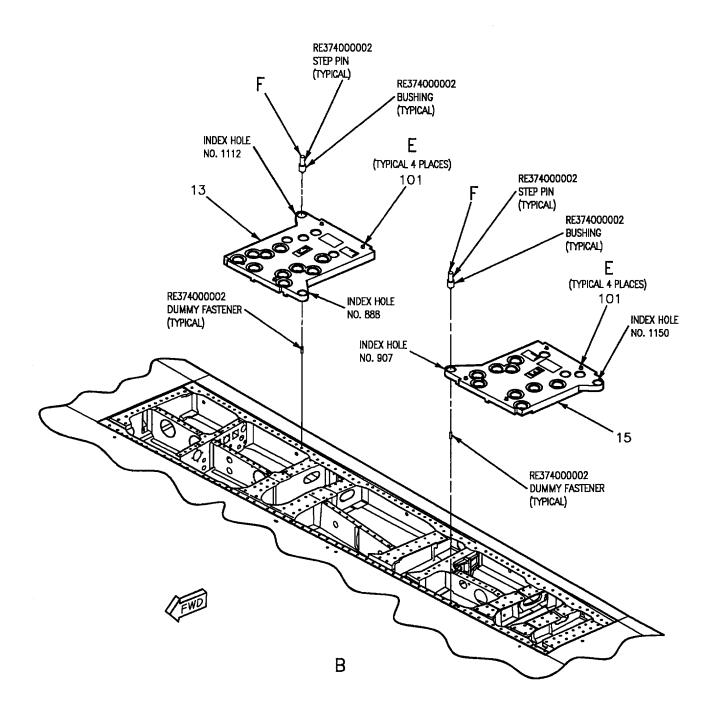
Installation of Plate Set for Drilling Door 79 (Sheet 1)
